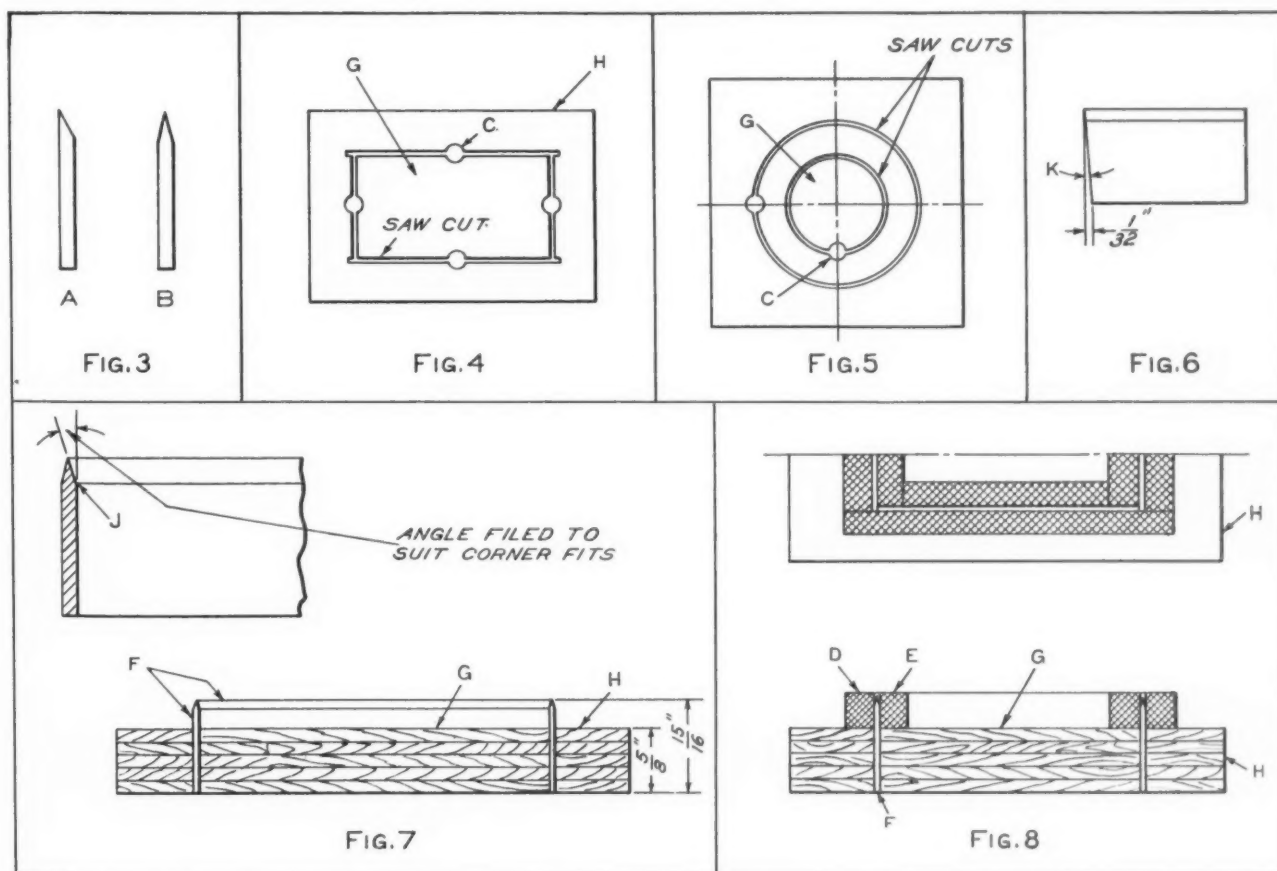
Two Types of Steel-rule Cutting Edges. Fig. 4. Rectangular Blank Frame with Holes *C* Drilled to Permit Taking Saw Cuts for Cutting Blades. Fig. 5. Frame for Washer-cutting Die. Fig. 6. End of Steel Rule Cut at Angle *K* to Give Close Fit when Ends are Joined. Fig. 7. Method of Joining Corners and Assembling Steel-rule Die. Fig. 8. Rectangular Die with Stripping Rubber *D* and *E* in Place
